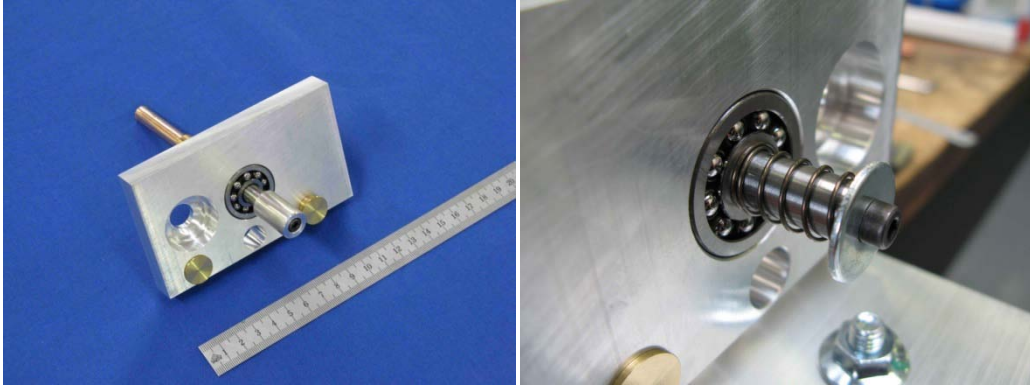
Alignment support with spherical bearings and (left) and the spring-loaded tension tool (right).
